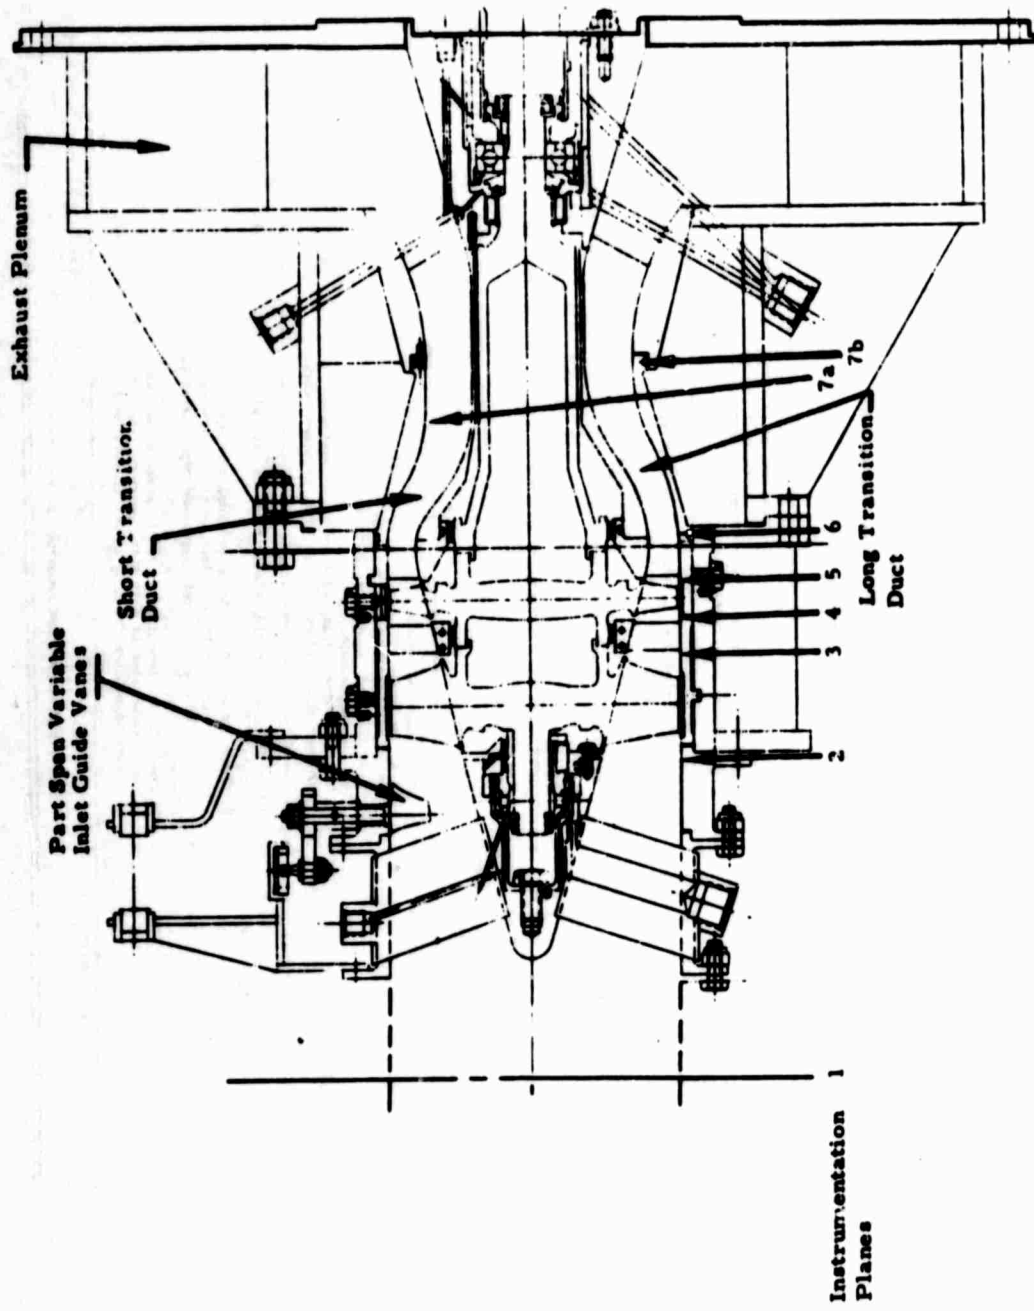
Advanced Axial Compressor Test Rig Design Layout - Instrumentation Planes.
